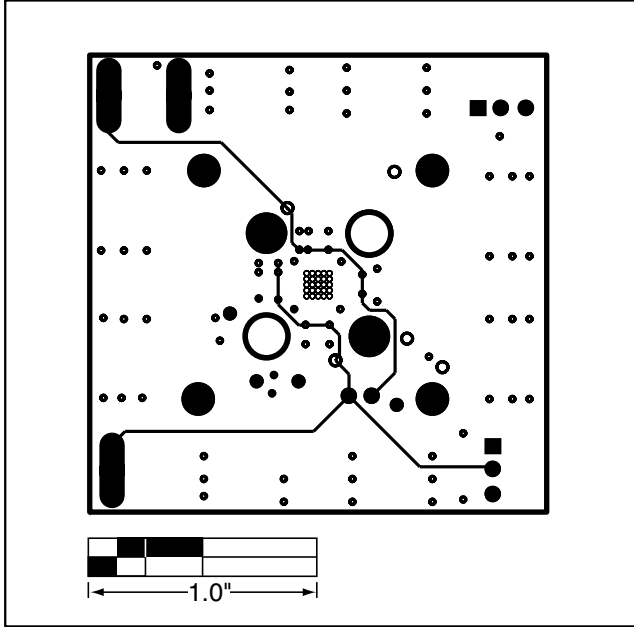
MAX3800UGJ EV Kit PC Board Layout—Power Plane
